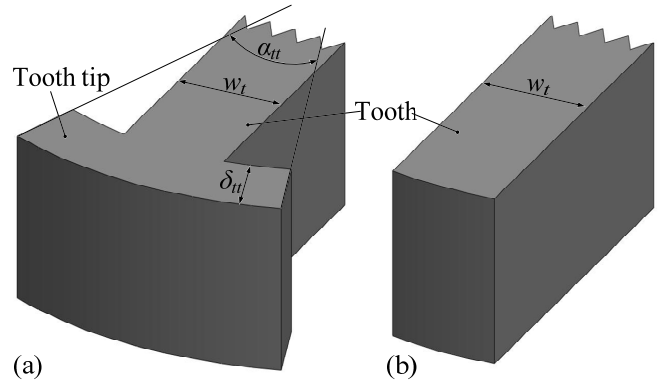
Shape of a stator teeth for a regular motor (a) and for the proposed bearingless motor (b).
